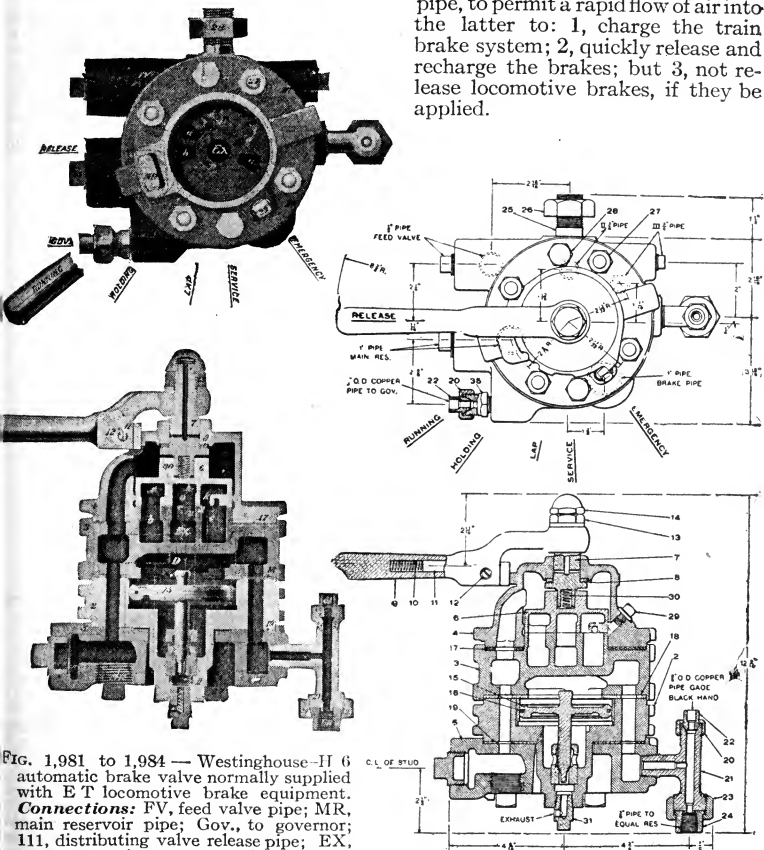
,981 to 1,984 — Westinghouse-H 6 automatic brake valve normally supplied with E T locomotive brake equipment.
